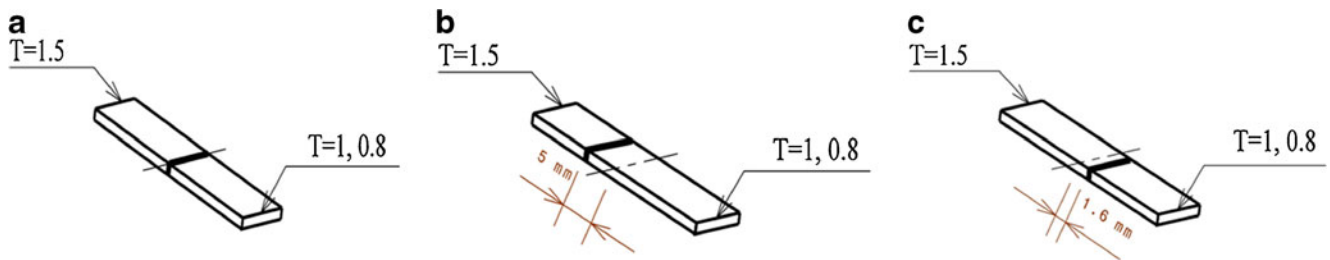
Different locations of weld line; a weld line at the center of the sample, b 5 mm movement of weld zone toward thick sheet, and c 1.6 mm movement of weld zone toward thin sheet
